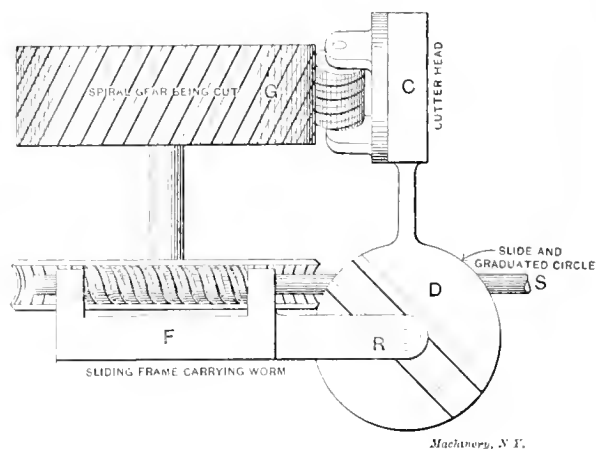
Diagram showing Method of Securing Accuracy of Spiral Angle of Gear Teeth.
